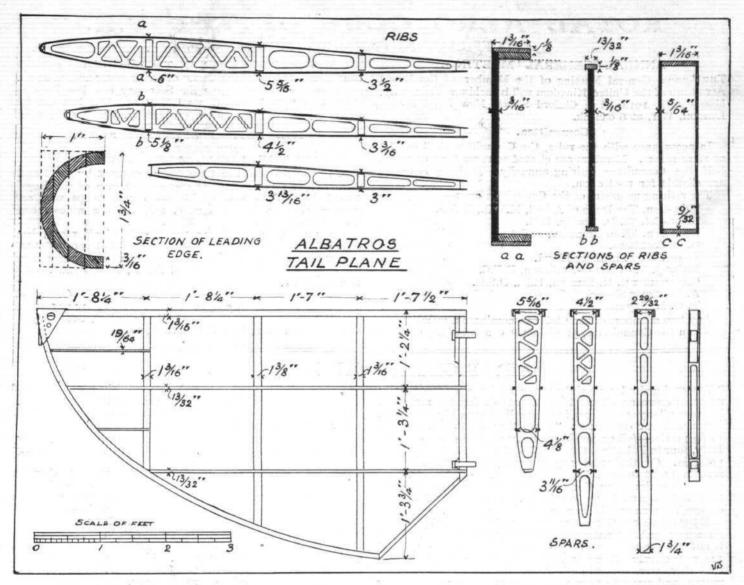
General arrangement and dimensions of the members of the tail plane on the Albatros biplane.
